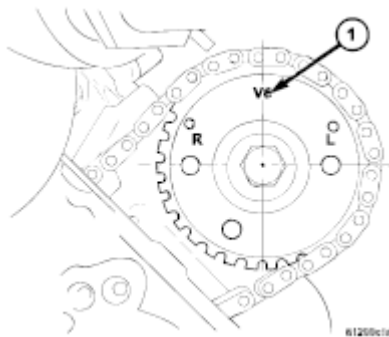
Identifying V6 Mark On Camshaft Sprocket
